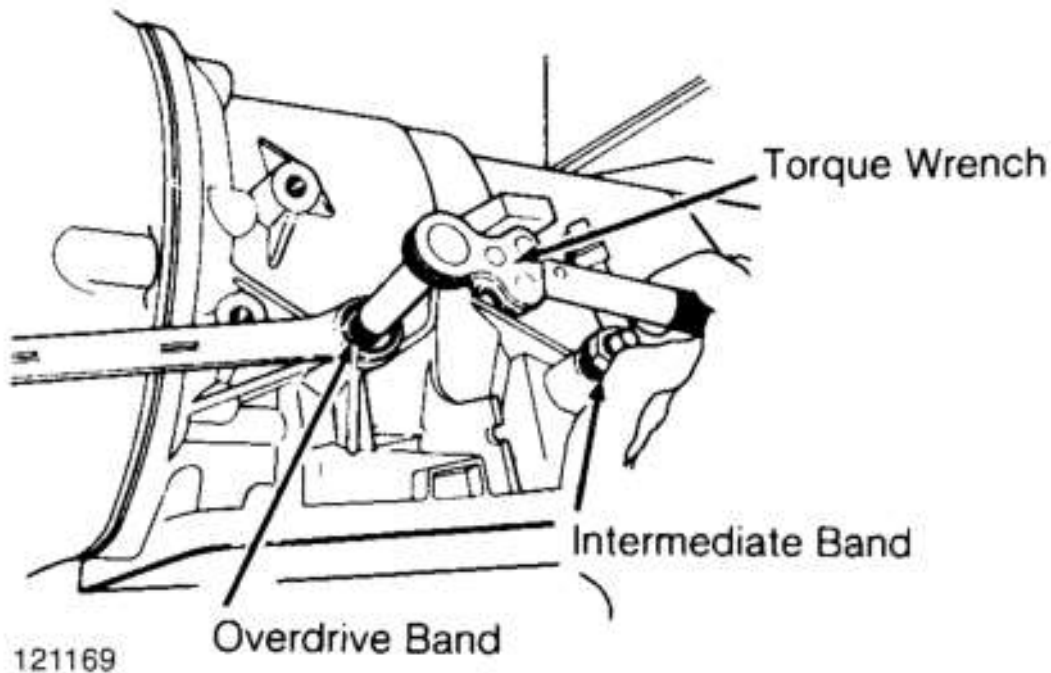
Adjusting Intermediate & Overdrive Bands (A4LD)
